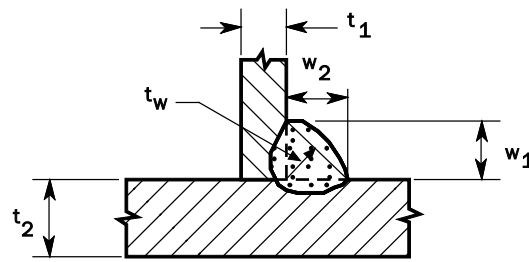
Fillet Welds - T-Joint
